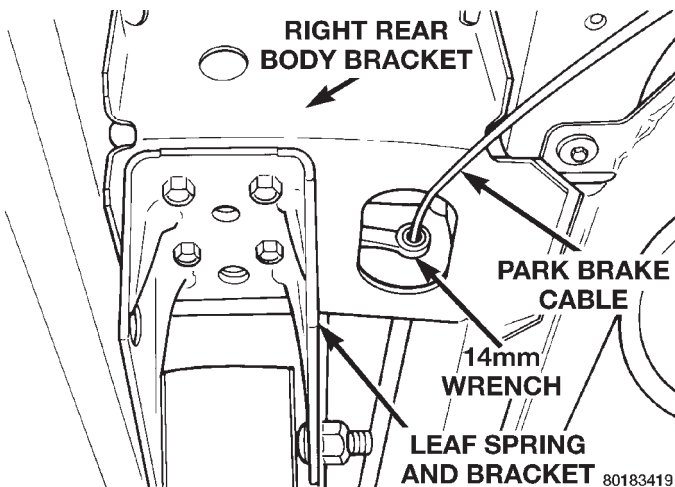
Right Park Brake Cable Removal From Body Bracket
